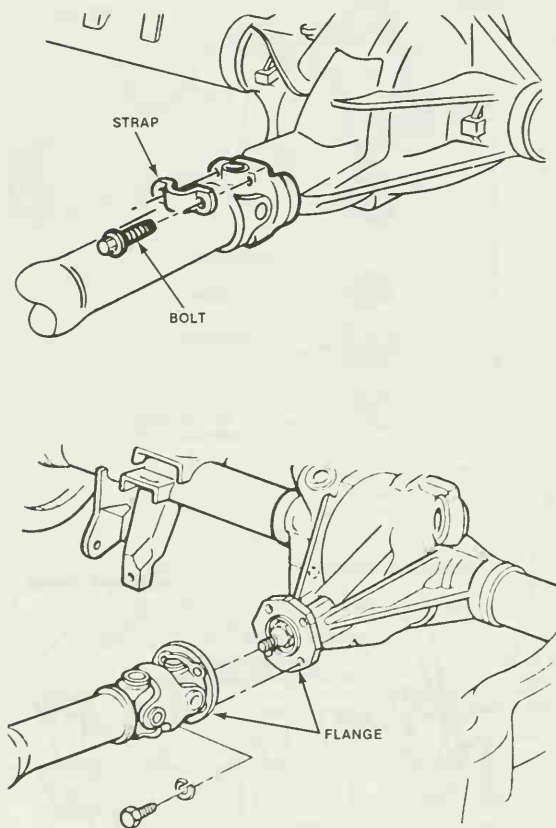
The two methods used to mount the universal joint to the pinion flange. (Chevrolet Motor Division of General Motors Corporation)
